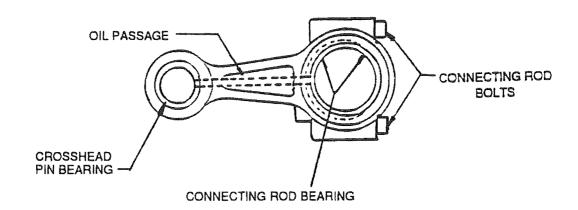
CONNECTING ROD SUB-ASSEMBLY
